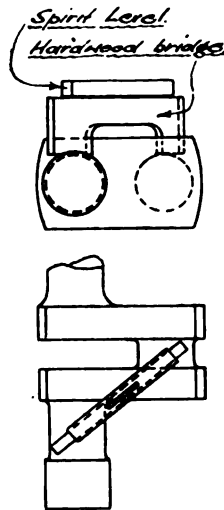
METHOD OF LEVELLING CRANK ON THE PLANING MACHINE.
